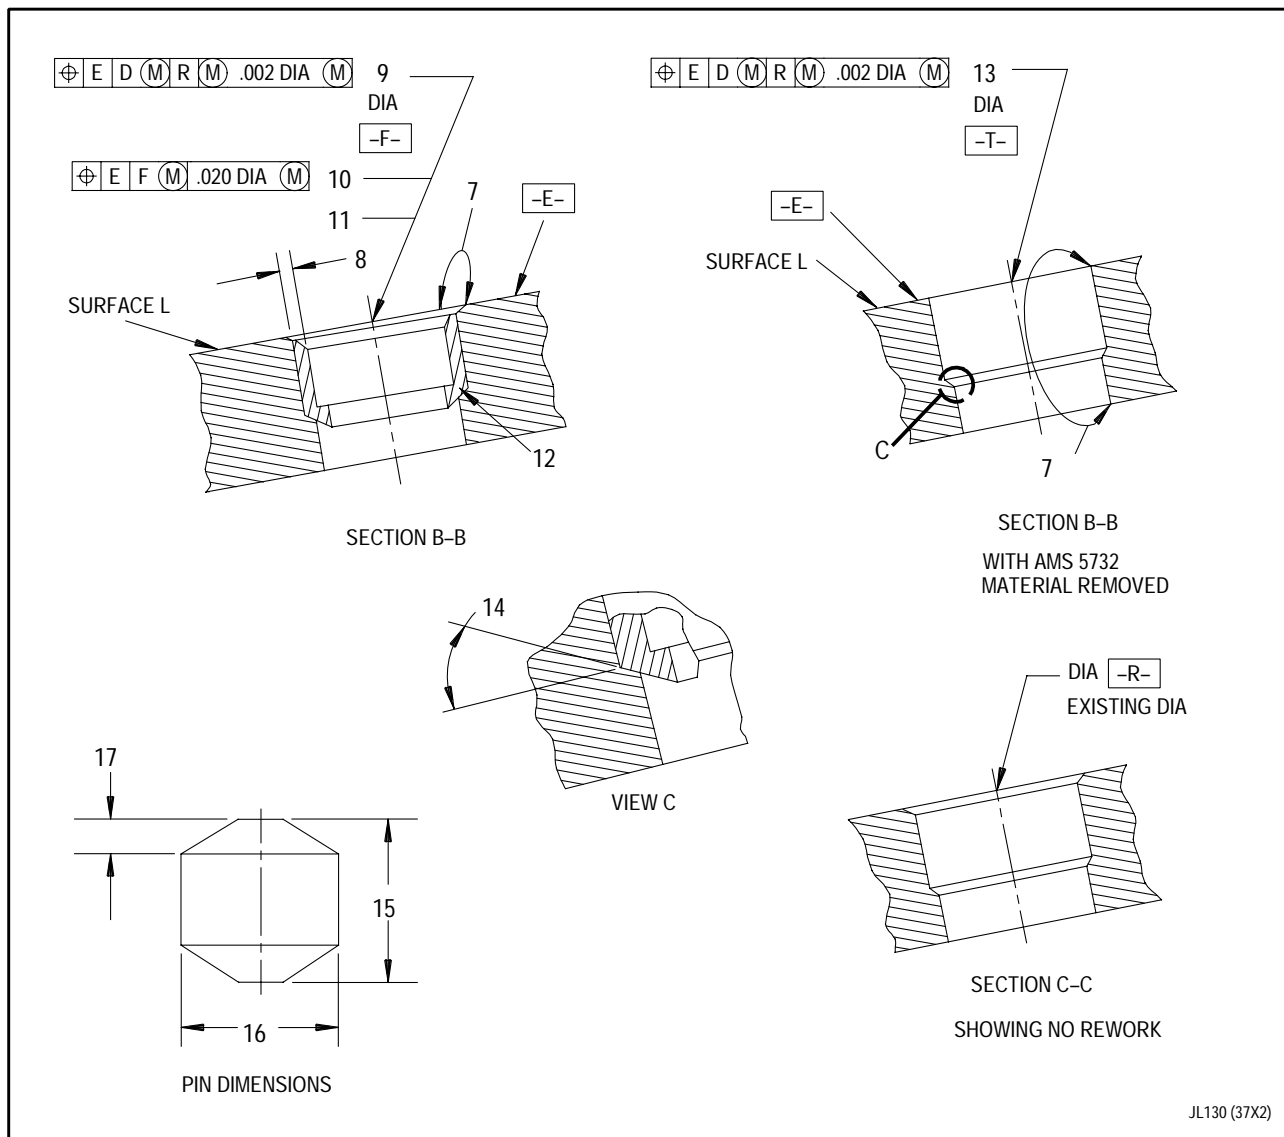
Gearbox (Front) Housing Assembly - Dowel Pin Holes Repair (Sheet 2 of 4)
